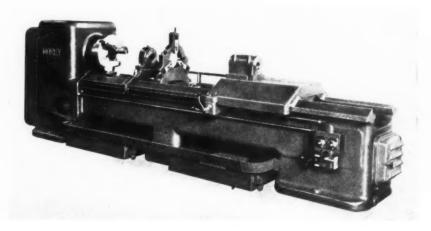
Morey Deep-hole Drilling and Reaming Machine Equipped for Boring Gun Recoil Cylinders
